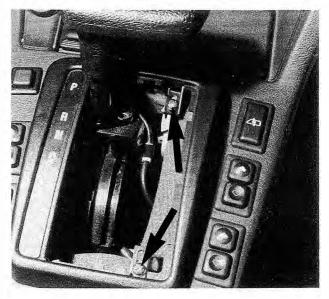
Screws to be removed (arrows) for removal of shift lever trim panel.
